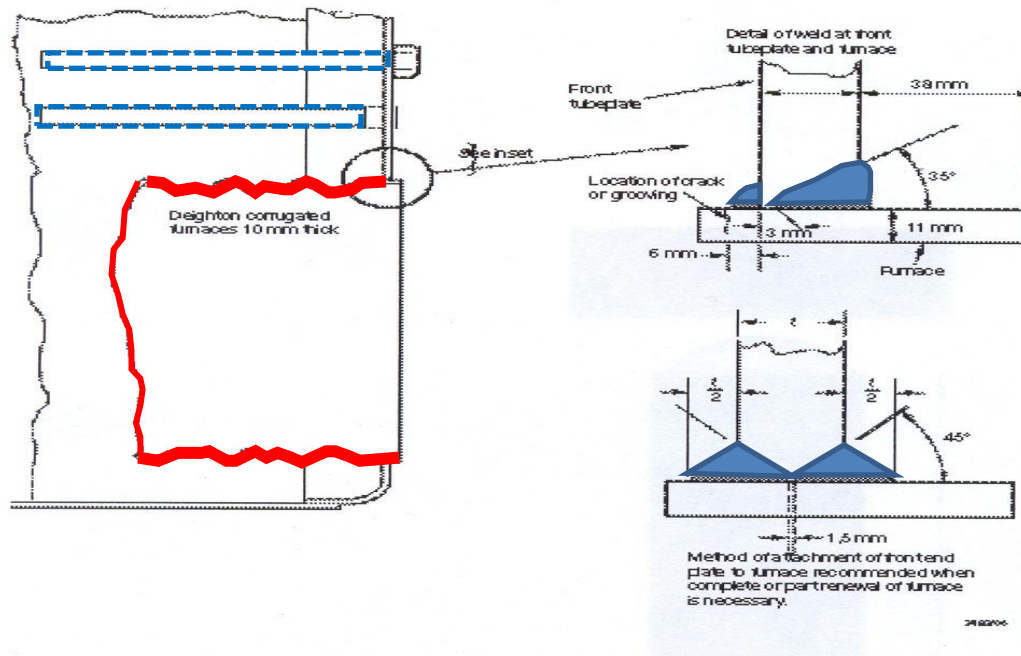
Example of circumferential cracking of furnaces at end plate connections of horizontal multitubular smoke tube boilers
